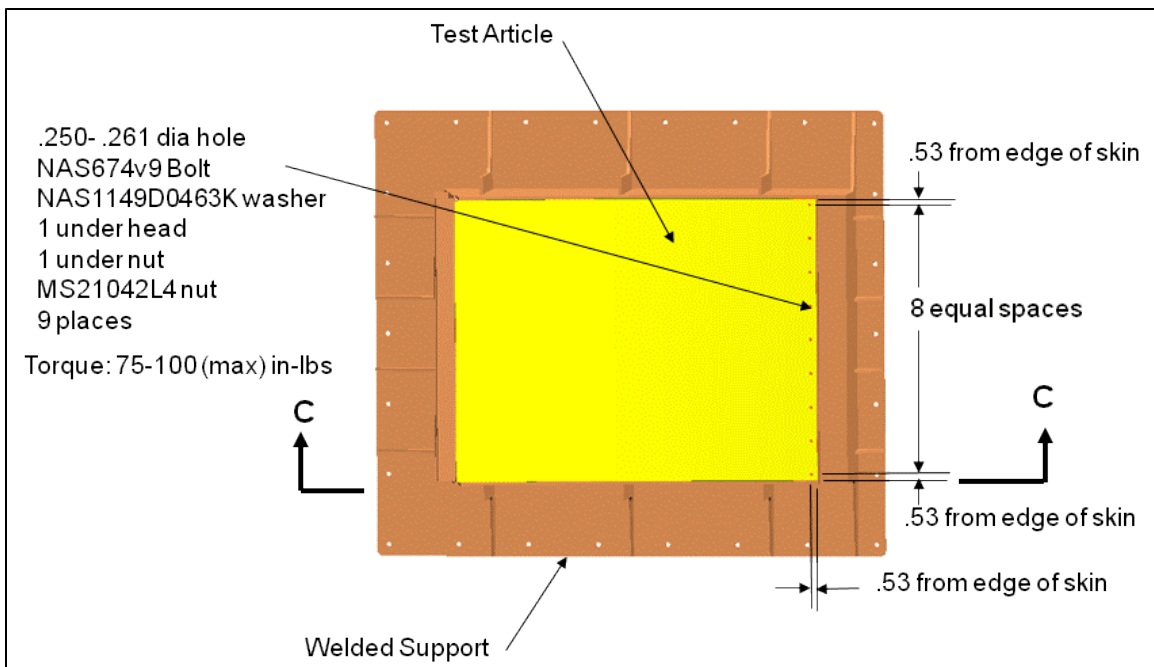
Bolt pattern to CEAC and T-58 test stands – drawing
